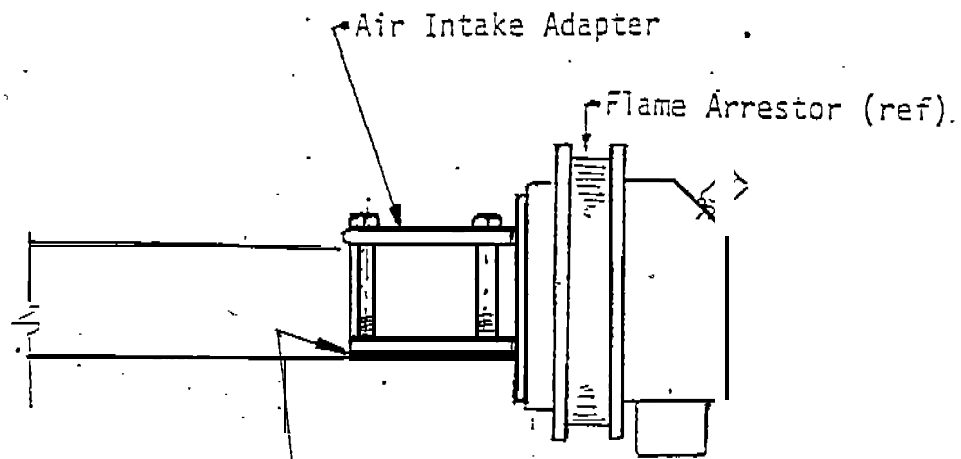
Gasket between Air Intake Adapter and Intake Manifold.
